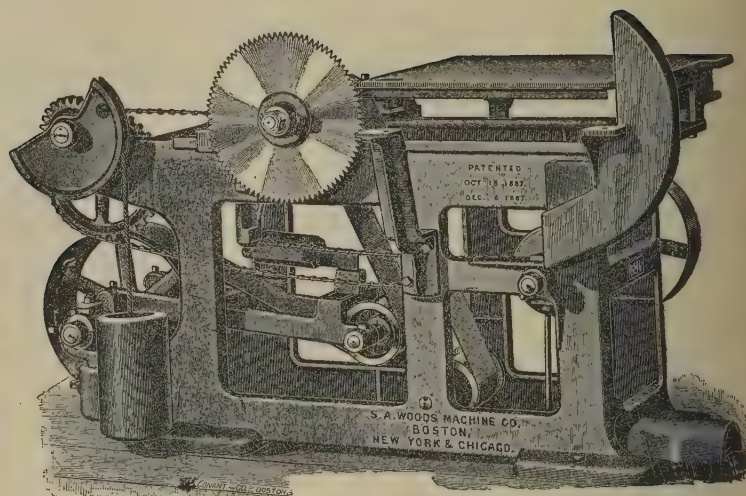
POWER FEED RAILWAY CUT-OFF SAW.
